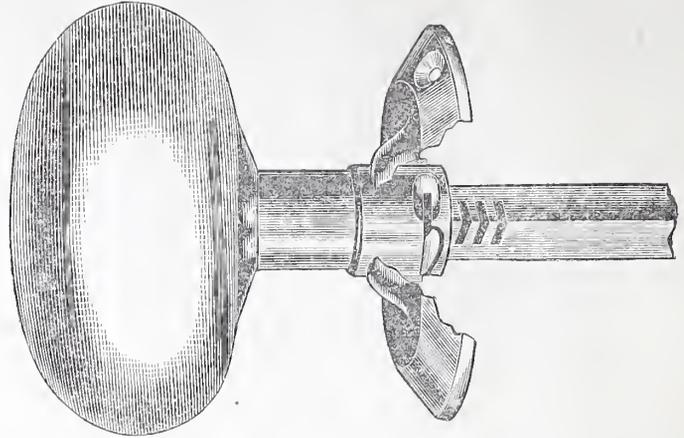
Improved Method of Adjusting Door Knobs upon the Spindle.
